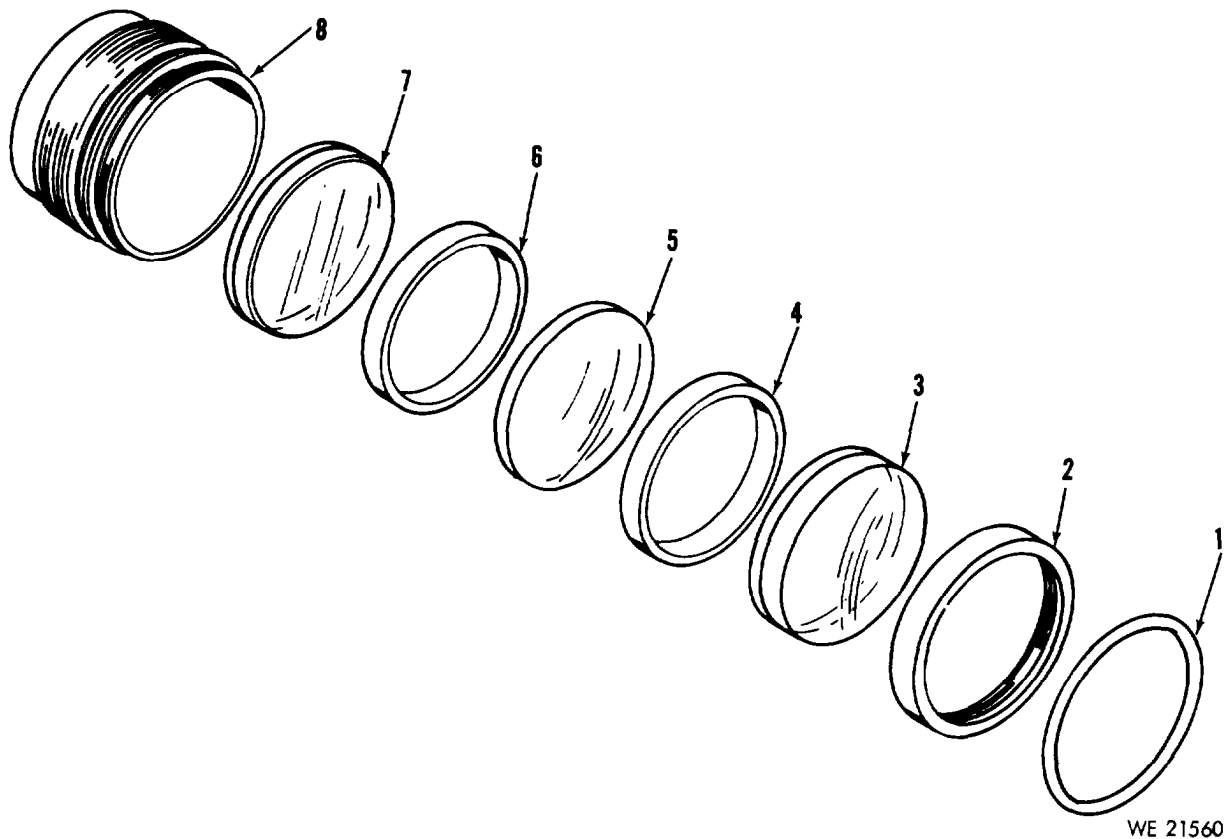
Cell 6650-903-3882 and related parts-exploded view.
